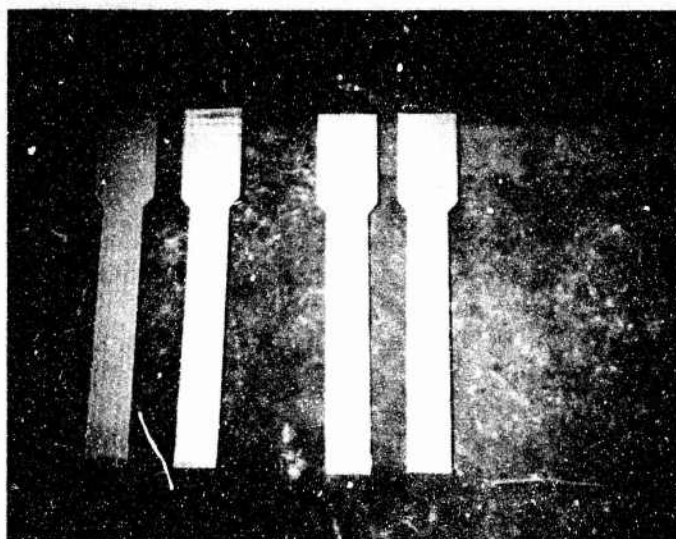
THE TWO, AS CAST, AMMRC DOUBLE TEST COUPONS, SECTIONED FOR MACROSCOPIC EXAMINATION
